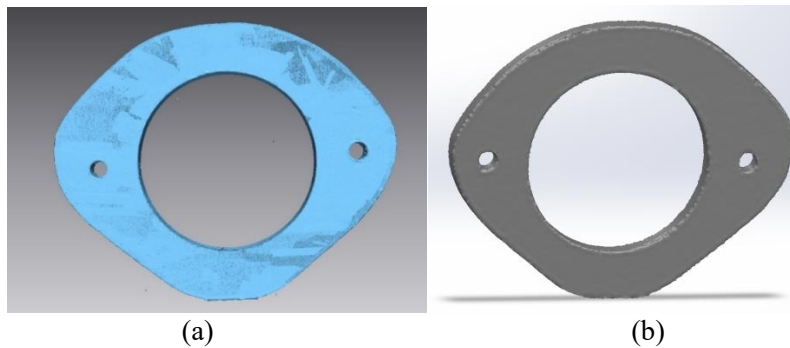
(a) Scanned gasket part using Faro® scan arm; (b) CAD model conversion
